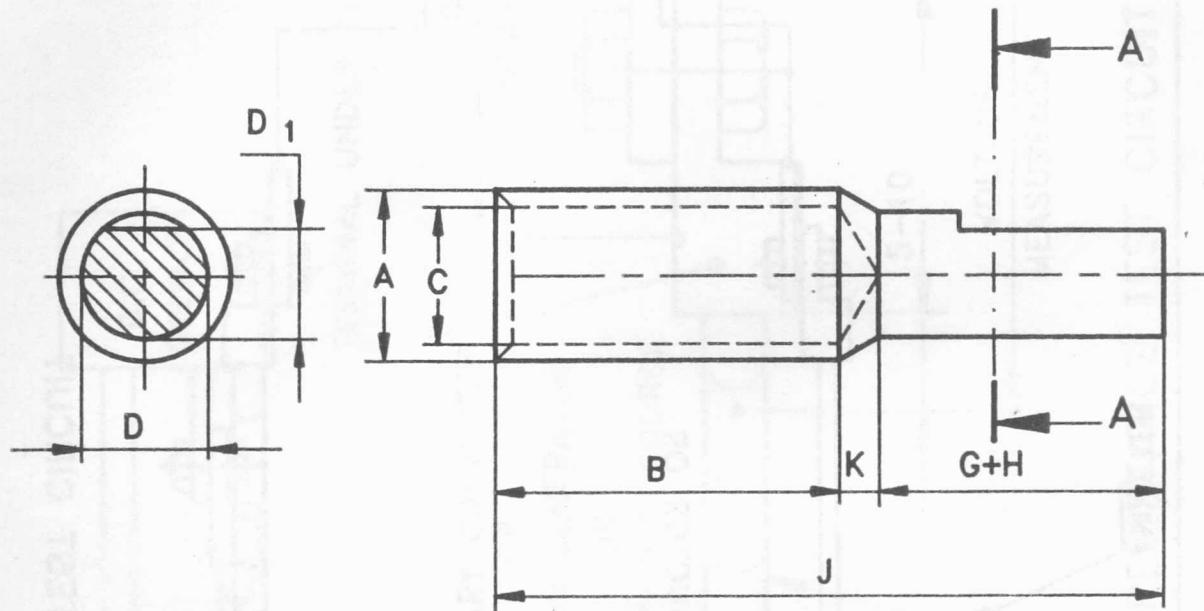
REDUCER TYPE TERMINAL ENDS FOR ALUMINIUM OR
